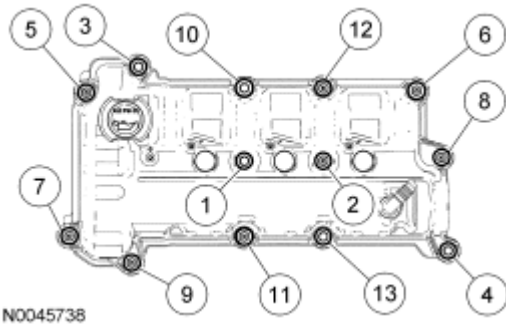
Identifying Tightening Sequence Of Valve Cover Bolts & Studs
